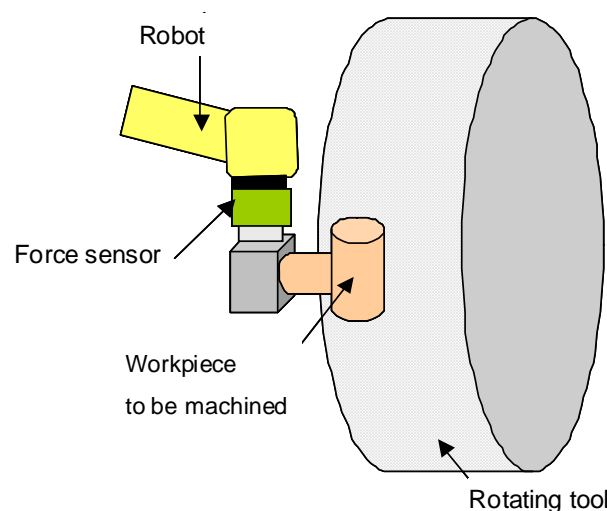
(b) Example of Buffing (with Workpiece Held by Robot)
